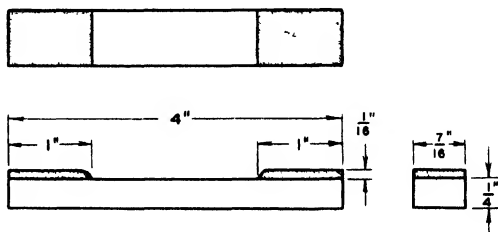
Fine Diamond Hone for Touching Up Tool after Grinding
